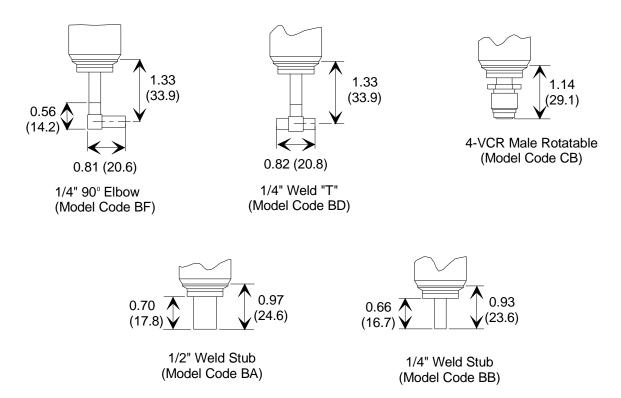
Dimensions of Additional Fittings for the Type AA07A Transducer
